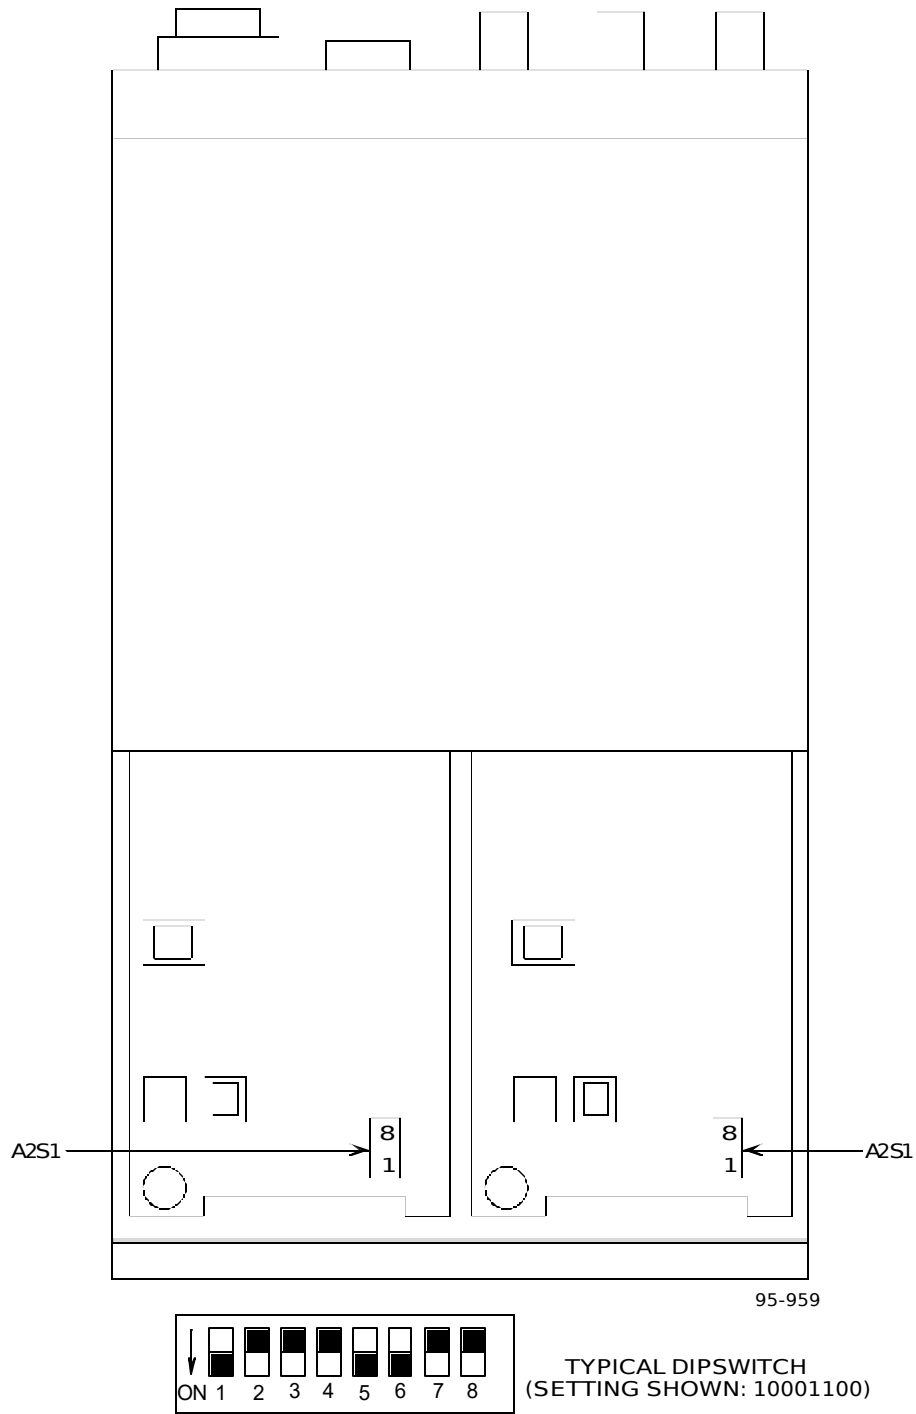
Location of A2S1 on the Microprocessor/Motherboard PC Assembly (A2)
